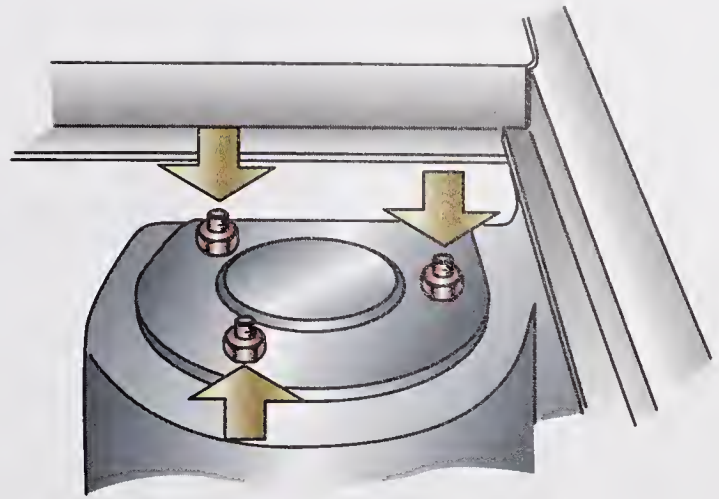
Removing upper strut mounting bolts on top of strut tower.
